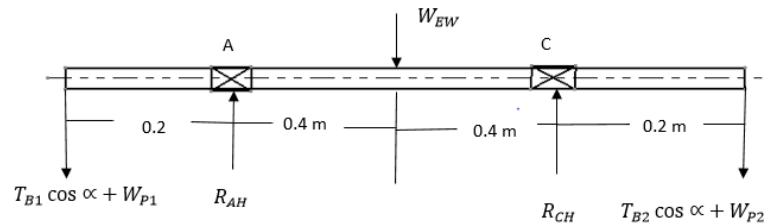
Free body diagram for eccentric wheel shaft on horizontal plane
